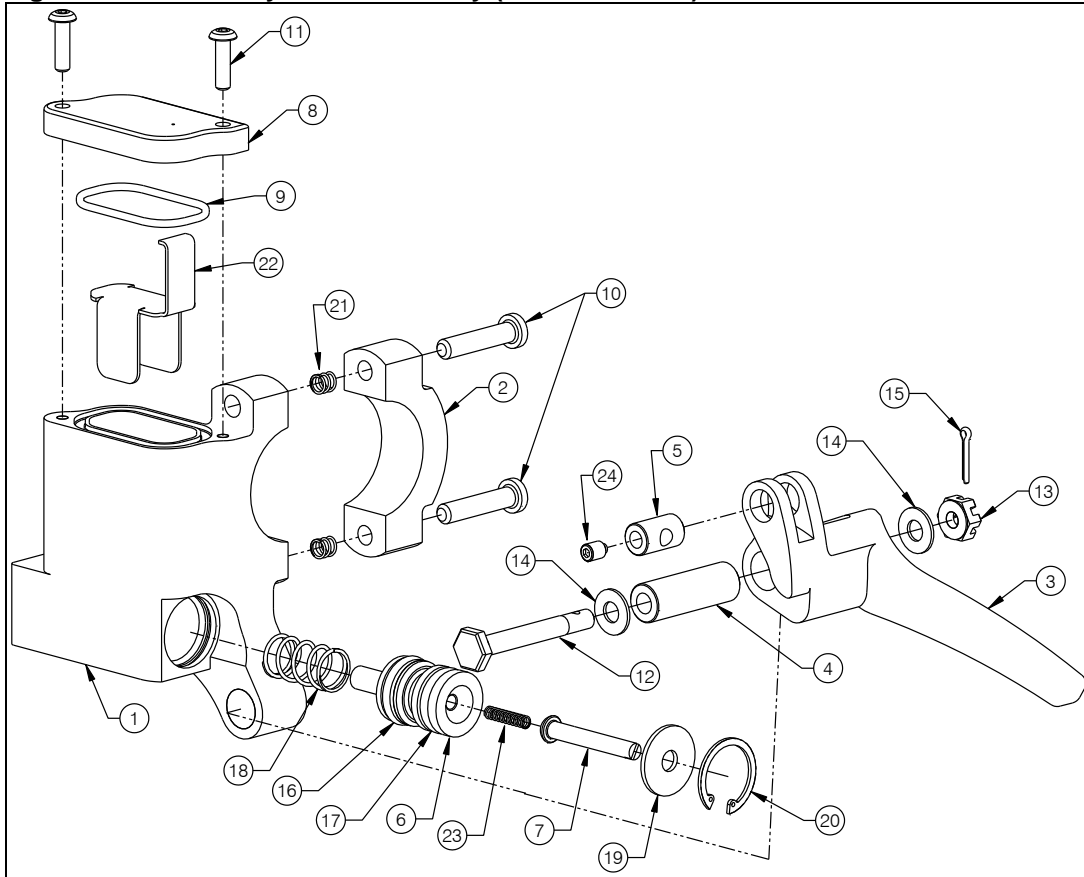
Master Cylinder Assembly w/ Plumbing (P/N 232-219-01) Parts
